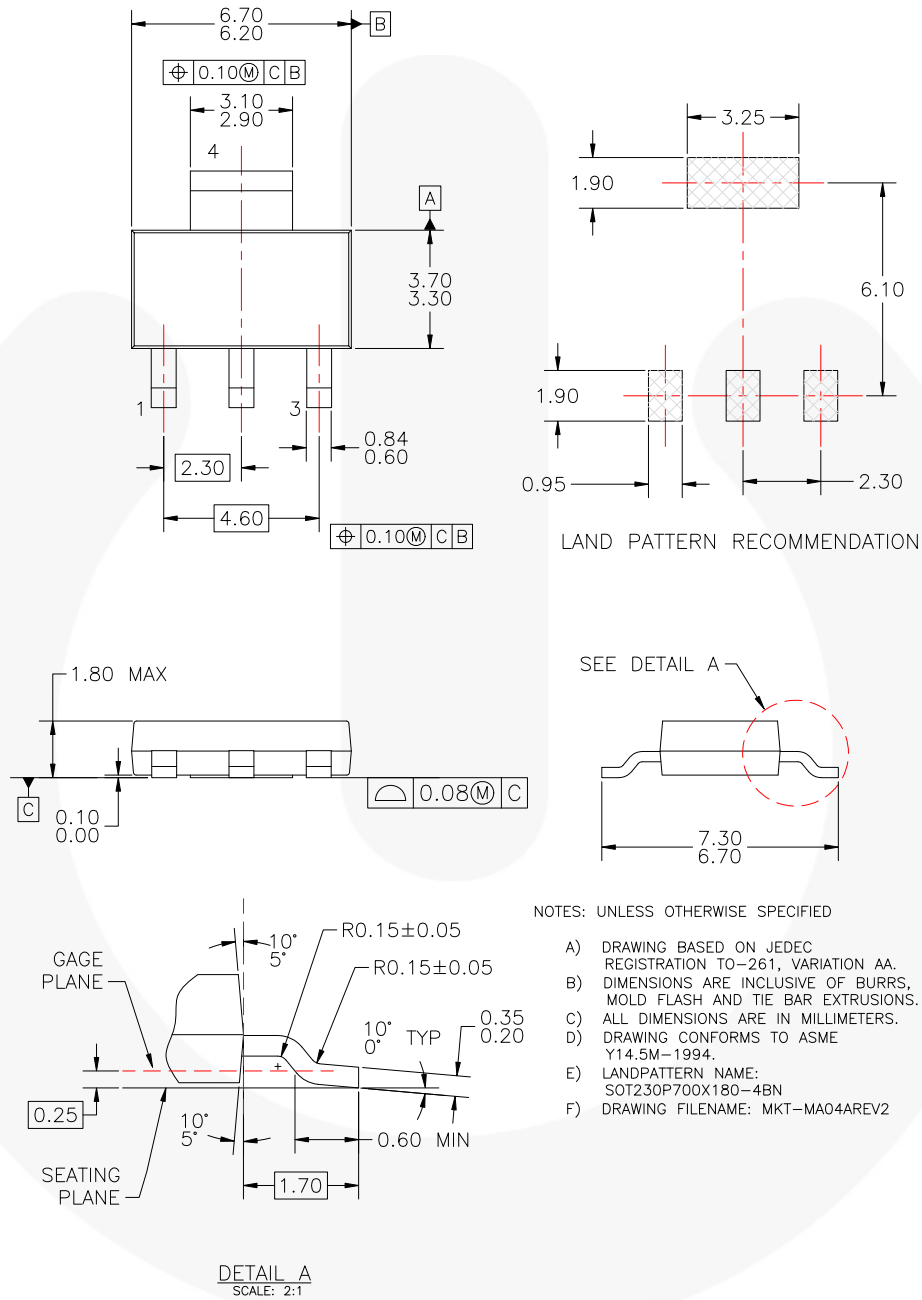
MOLDED PACKAGE, SOT-223, 4-LEAD
